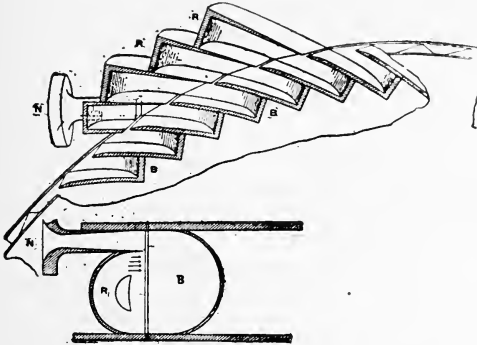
Arrangement of Buckets and Reversing Chambers in a Terry Steam Turbine.
